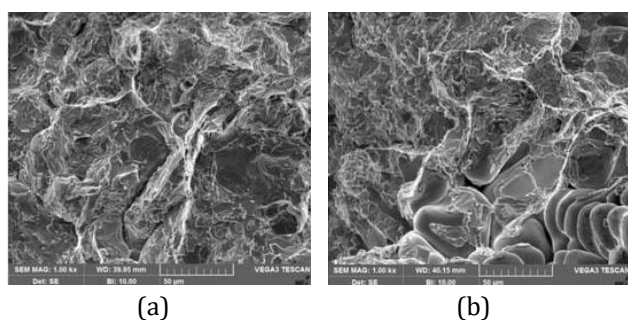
Tensile fracture of (a) A1 sample, (b) A3 sample.
